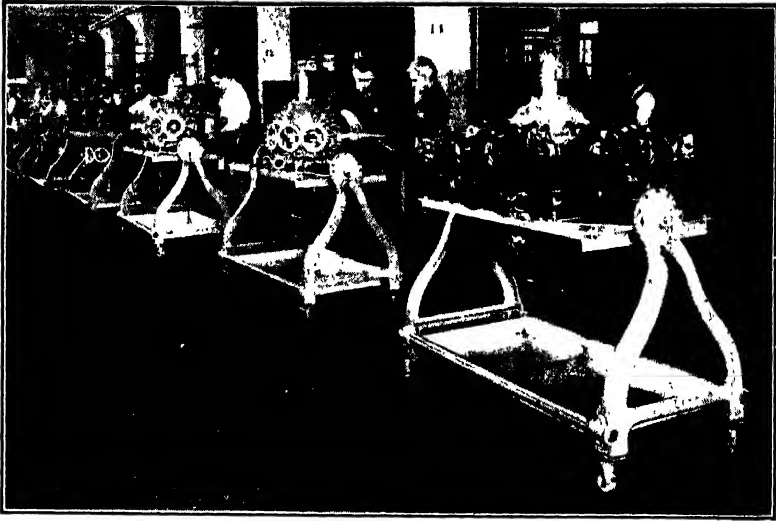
Typical Bay of Pratt and Whitney Assembly Floor Showing Progressive Assembly of "Wasp" Aircraft Engines.
